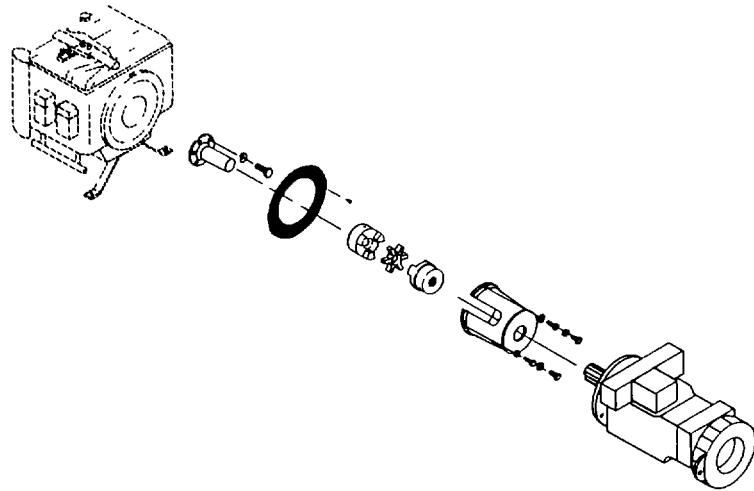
Stub Shaft and Coupling (Sheet 1 of 2).
